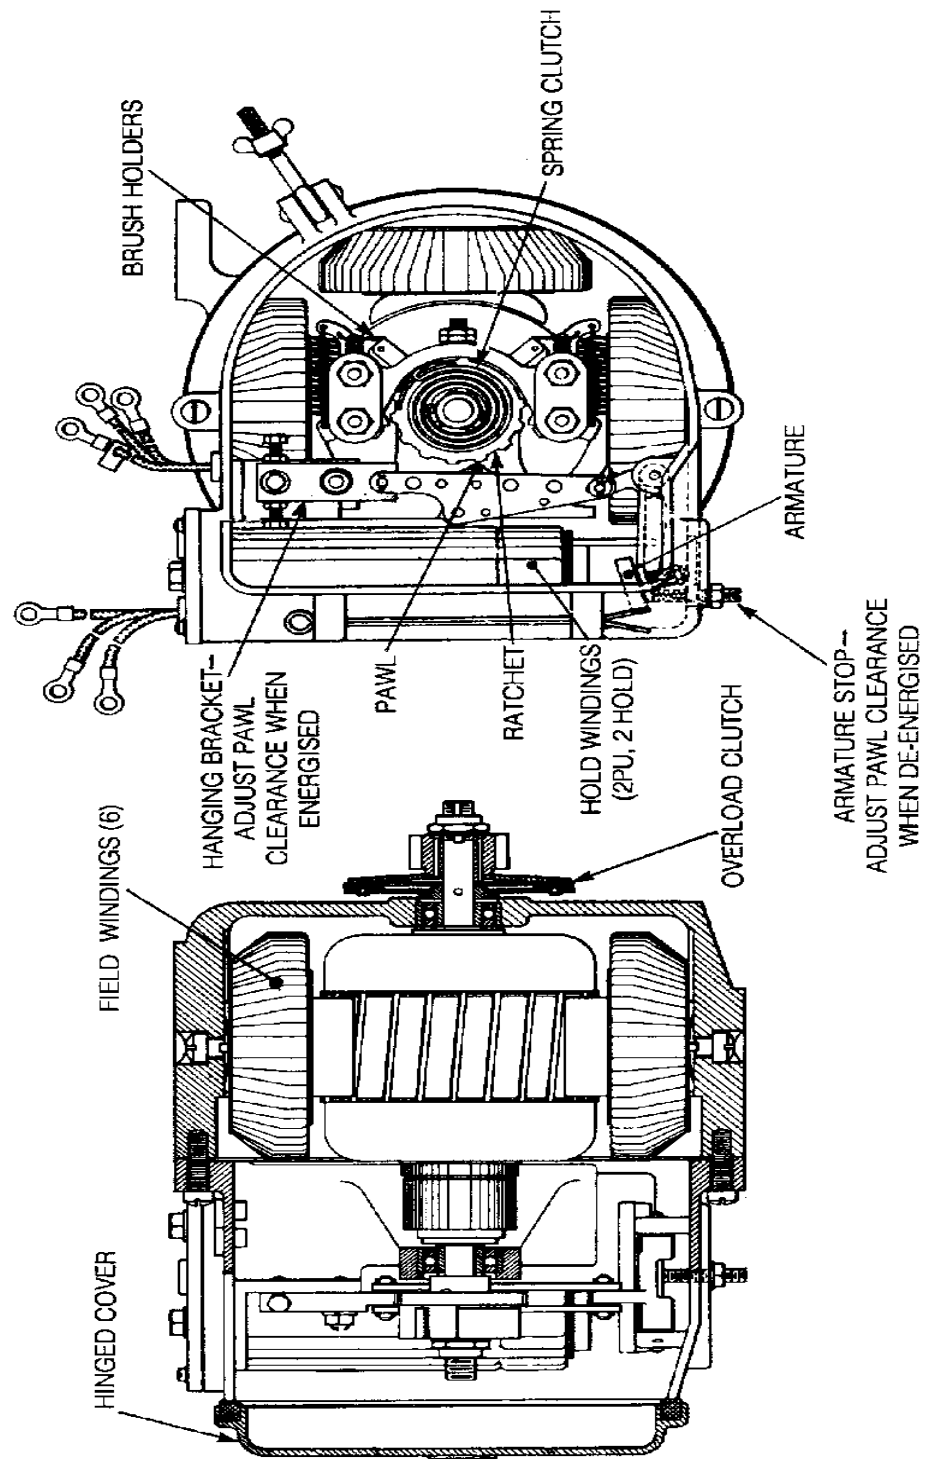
WRRS B and D Type mechanism motor and hold-clear
